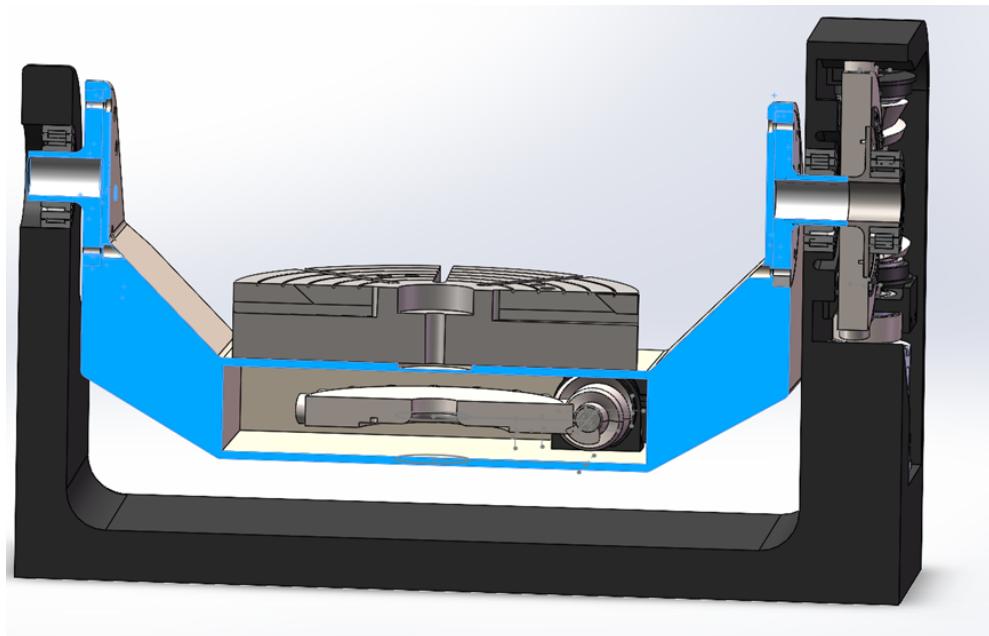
Sectional view of the entire design, with swinger, marked blue
